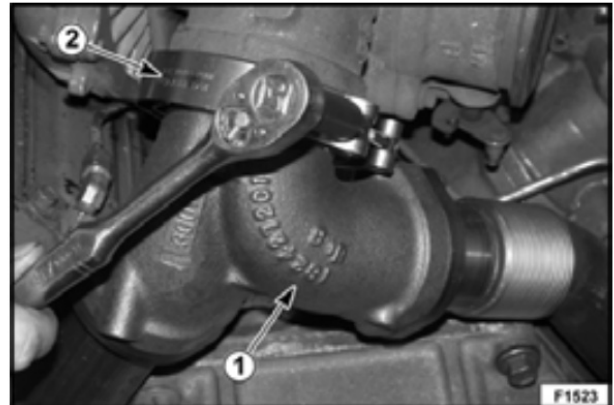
Removing Exhaust Inlet Adapter from Turbocharger, Engine With Exhaust Bellows Feature Shown (1998 through 2003 Model Years)
